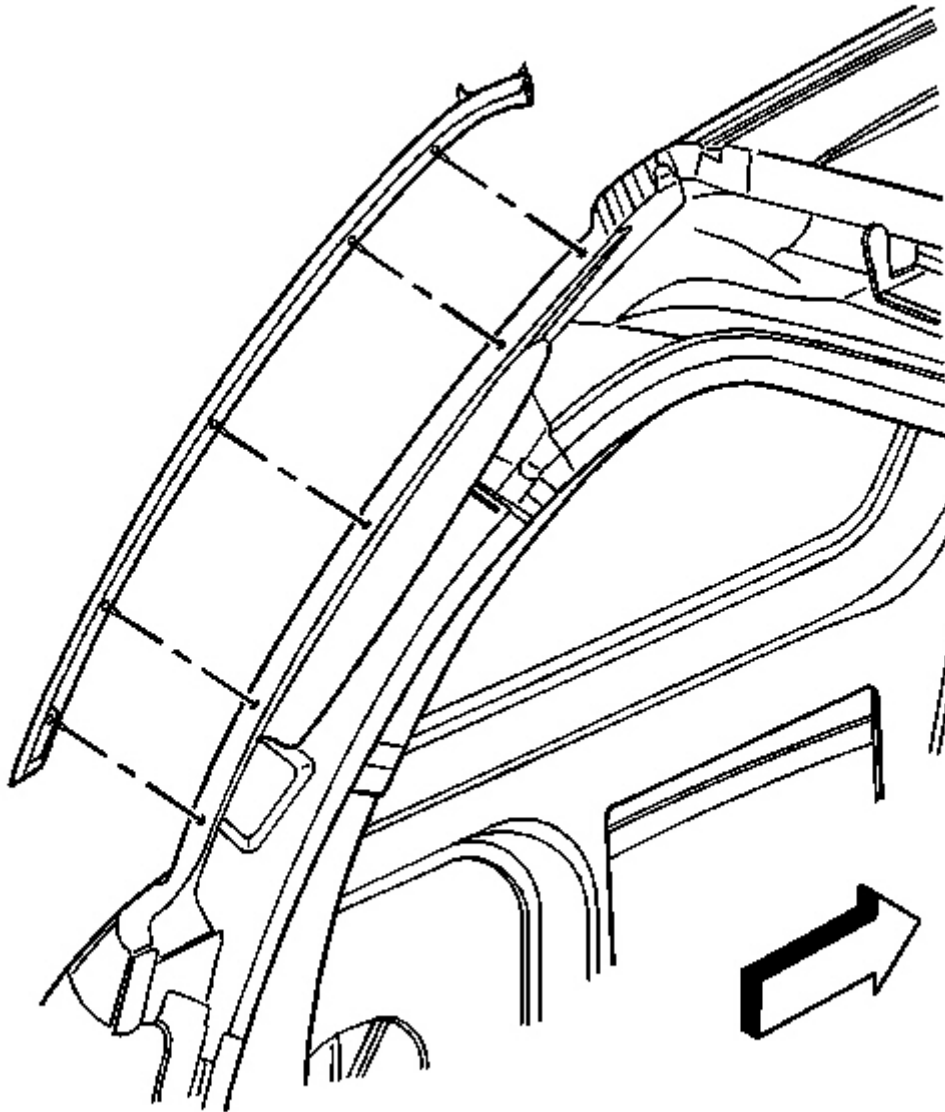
Identifying Hood Molding & Retaining Clips
